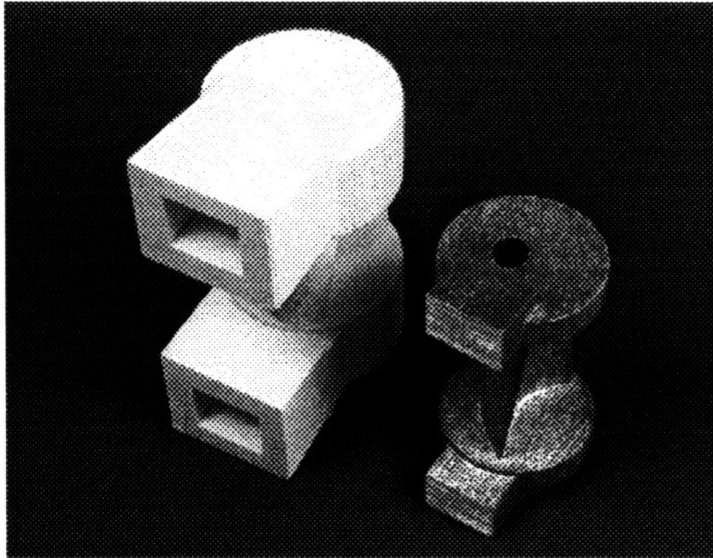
Shell produced by 3D Printing with the Resulting Casting
